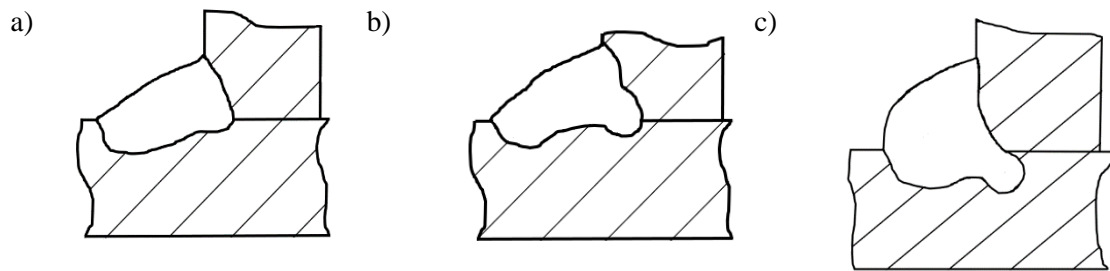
Welding seam form and penetration of welded samples:
